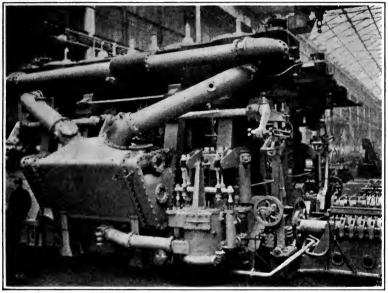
Engine-driven air pump and Weir condenser. Reciprocating engine installation.
